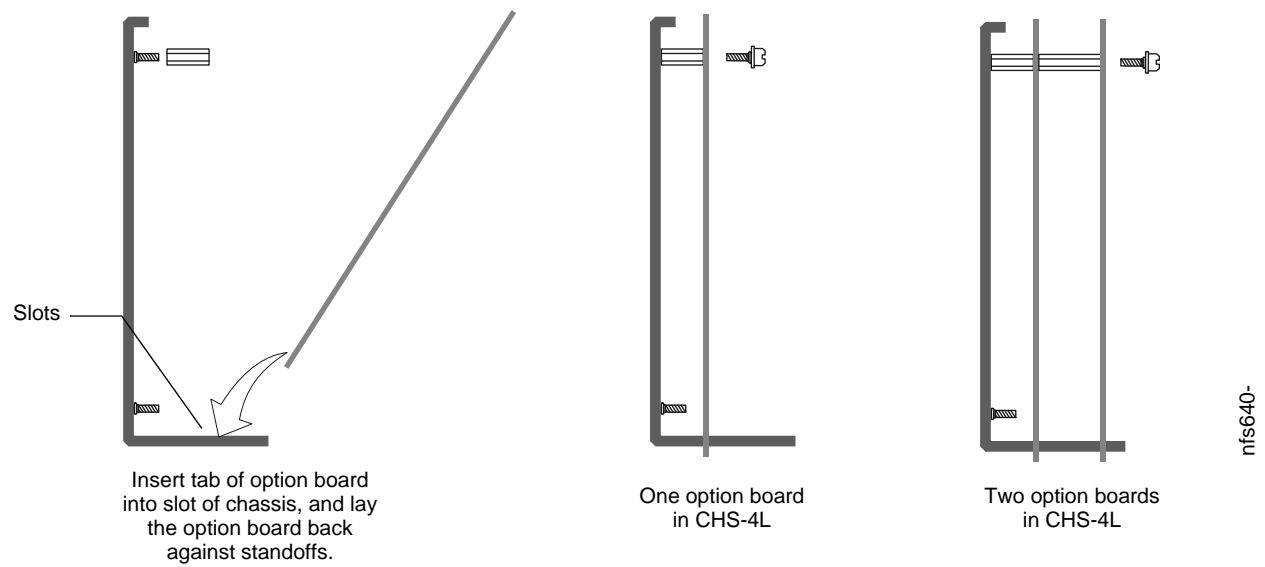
Mounting an Option Board in a Chassis (CHS-4L Shown)
